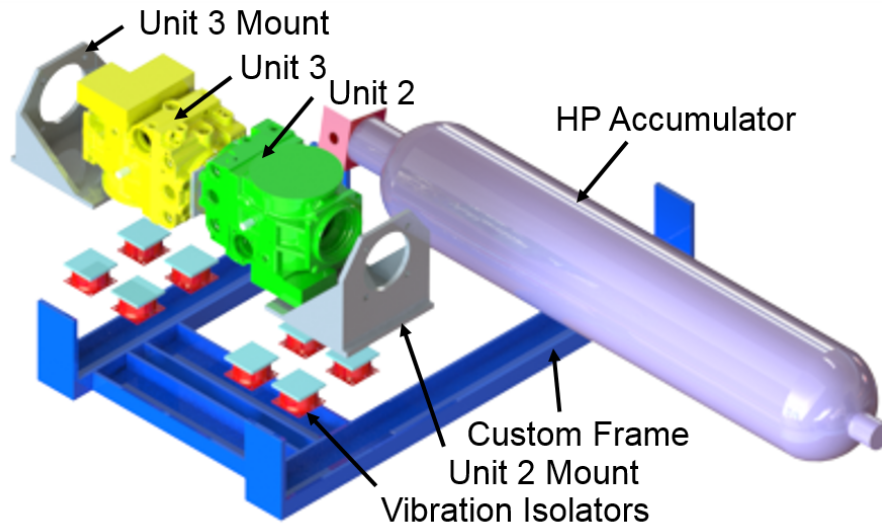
Unit 2, Unit 3 and HP Accumulator Exploded View.
